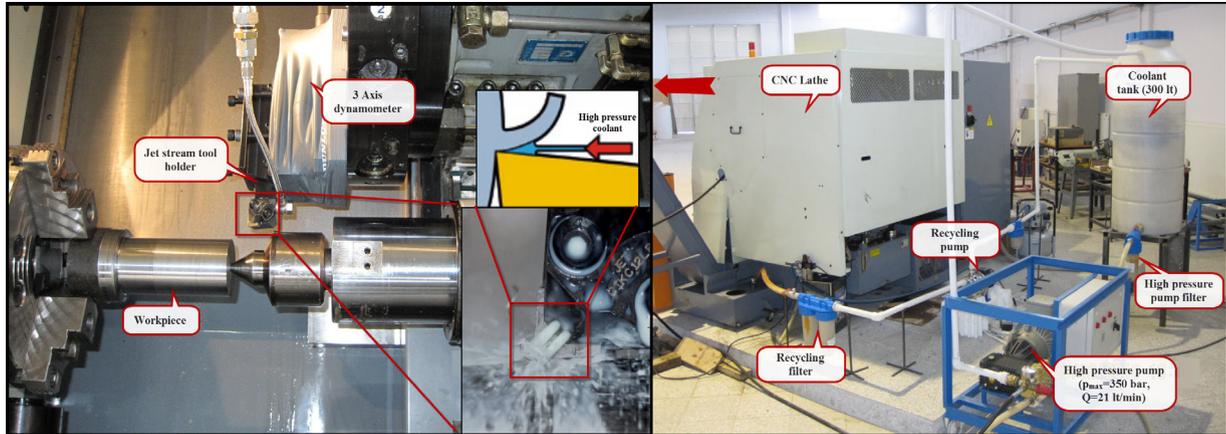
Experimental set-up, with the detailed view of high-pressure injection system
